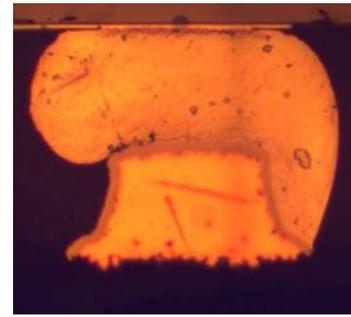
Poor Soldering of a Damaged LF2 Bump With 1.5 mil Thick Flux
